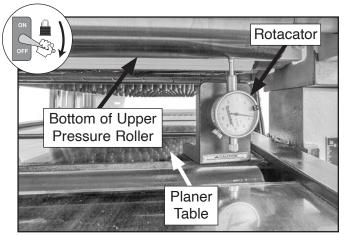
Rotacator placed underneath left-side of upper pressure roller.
